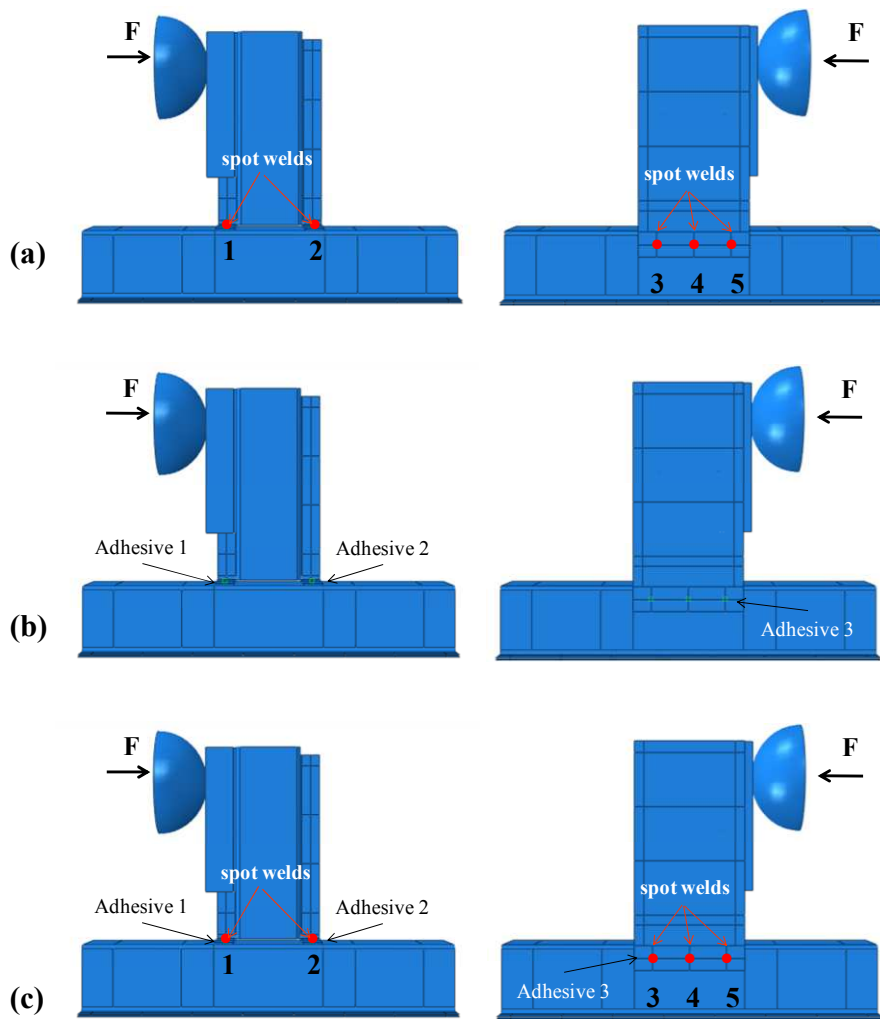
Illustration of T-joints: (a) spot welded, (b) adhesive bonded and (c) weld bonded
